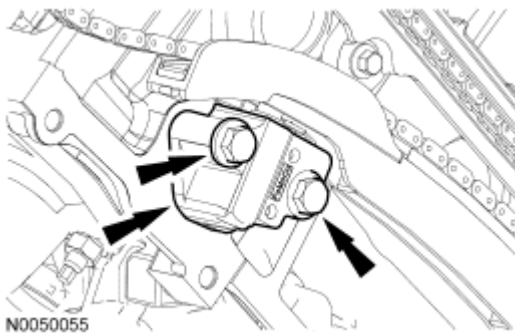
Locating RH Primary Timing Chain Tensioner Bolts
